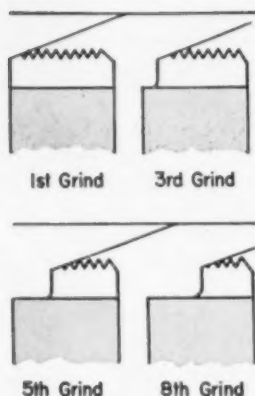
Step in chaser facilitates threading close to a shoulder.
